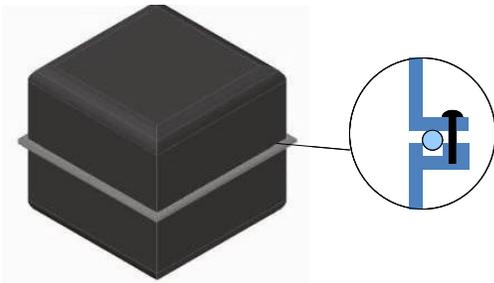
Clamshell Design with Detail of Bolted Flange and O-ring²⁰
